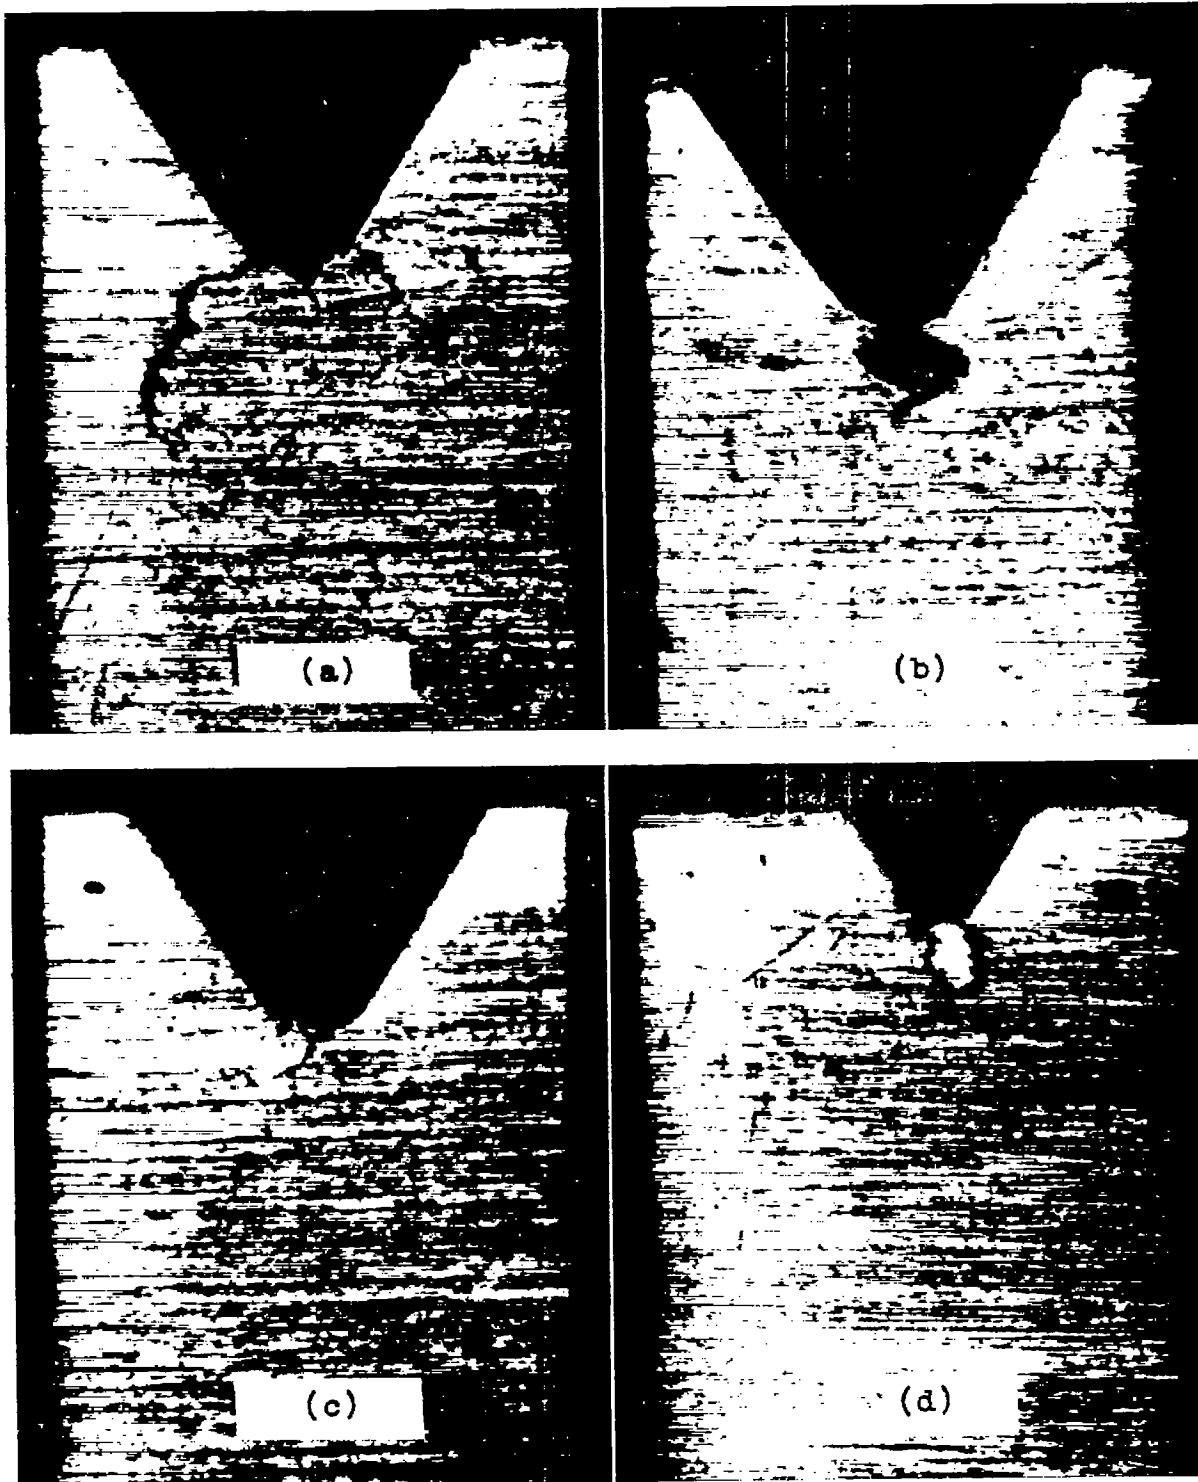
to d.- Cracks at end of notch in specimens tested in compressive stress cycles.
